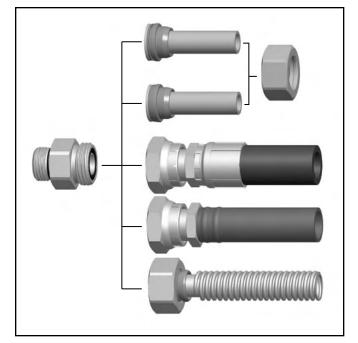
Seal-Lok Lite works with inch or metric tube, hose, and Flex Flange assemblies.
